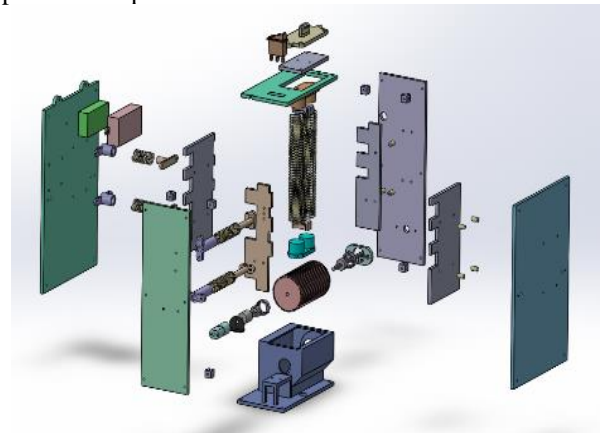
Exploded view of the mechanical structure model of the soap cutting device
